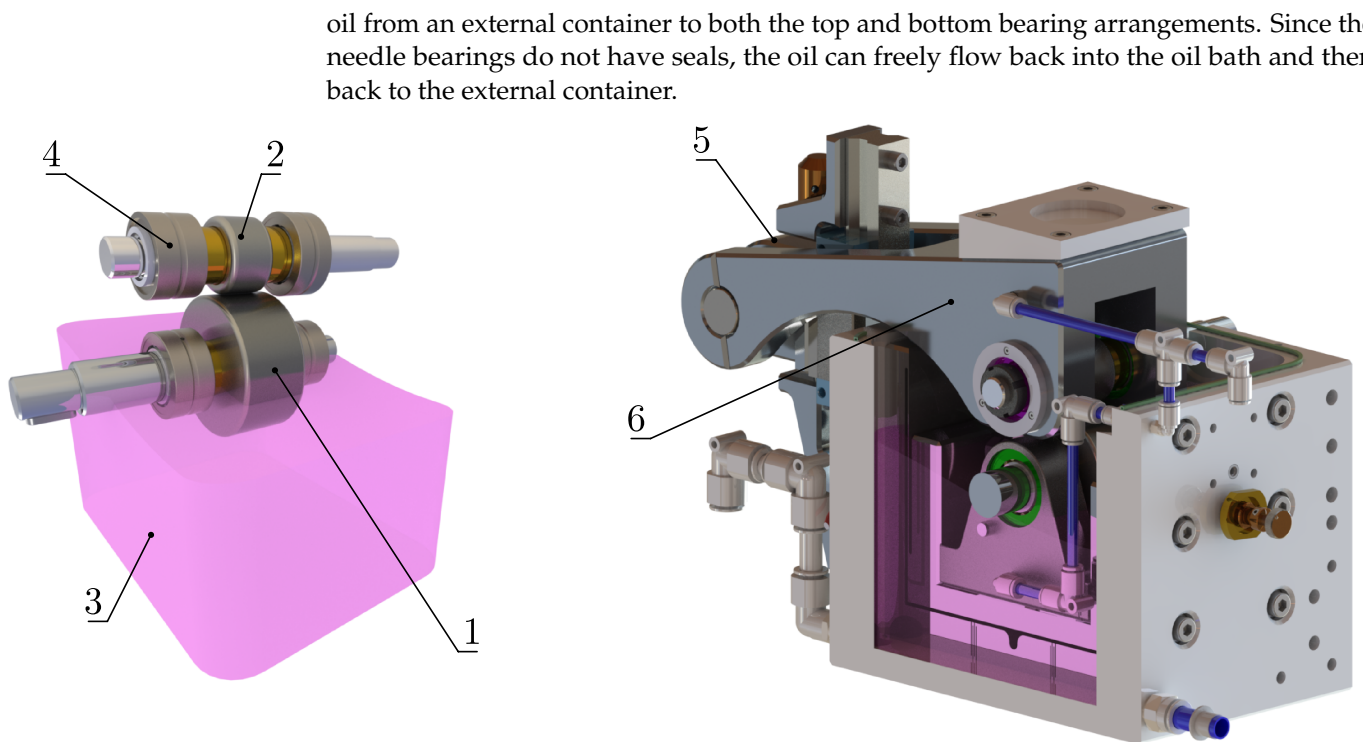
Test rollers and cross-section view of the core of the CRT. Bottom roller (1). Top roller (2). Oil bath (3). Needle bearing arrangement (4). Pivot point (5). Top roller arm (6).
